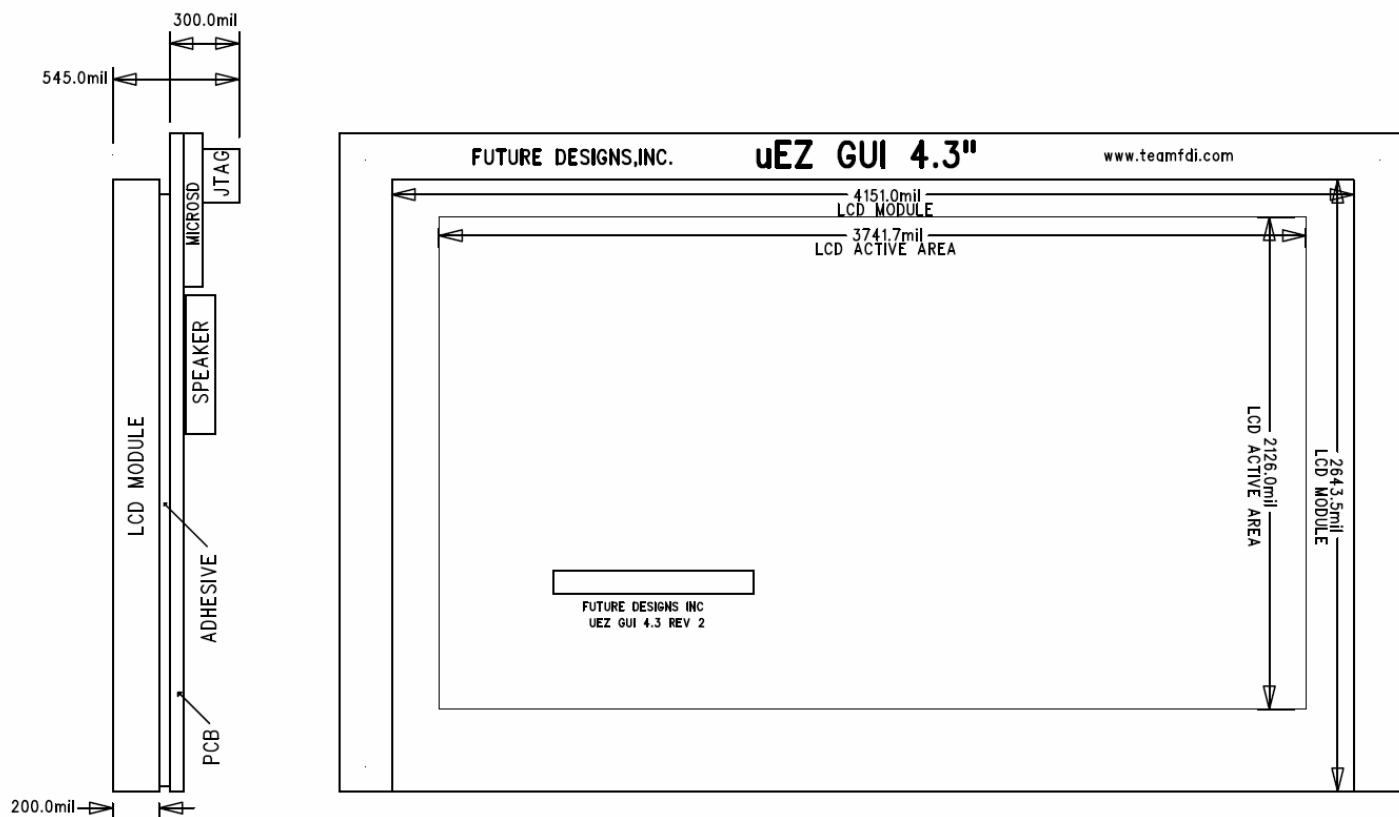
Mechanical Dimensions (LCD Module View and Side View)
